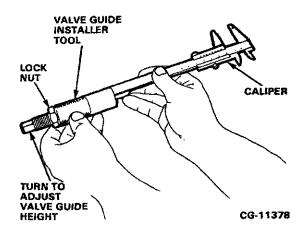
Adjust Valve Guide Installer Tool to Specified Height
